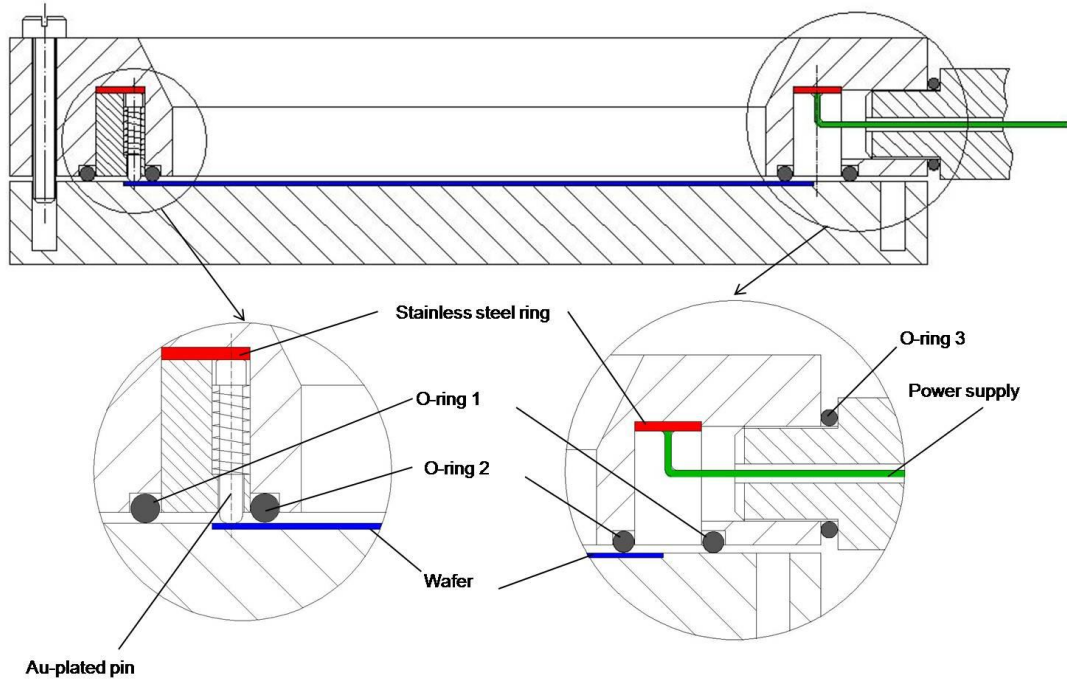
Assembly of wafer holder for electroplating on 4 inch silicon wafer samples.
